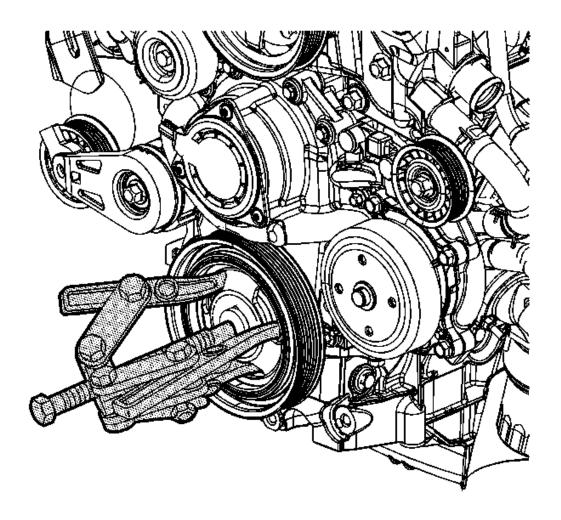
Removing Crankshaft Balancer Courtesy of GENERAL MOTORS CORP.
